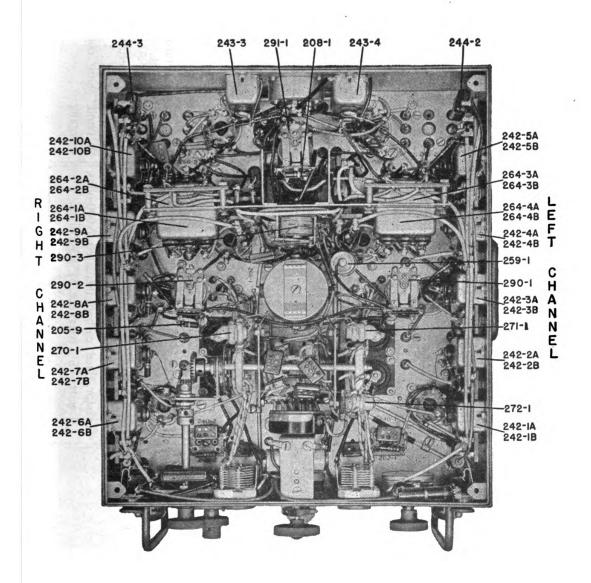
Chassis of Radio Receiver BC-1003-B, bottom view showing location of parts.
